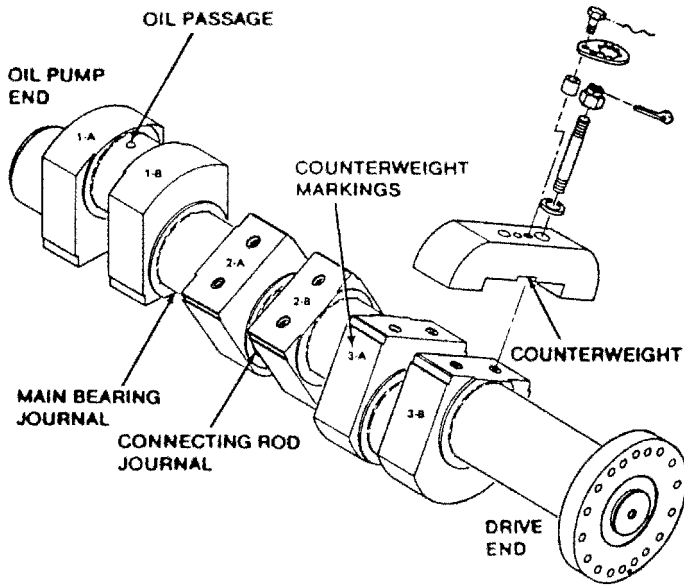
Three-throw crankshaft showing oil passages and counterweights. (*Dresser-Rand Company, Painted Post, N.Y.*)
